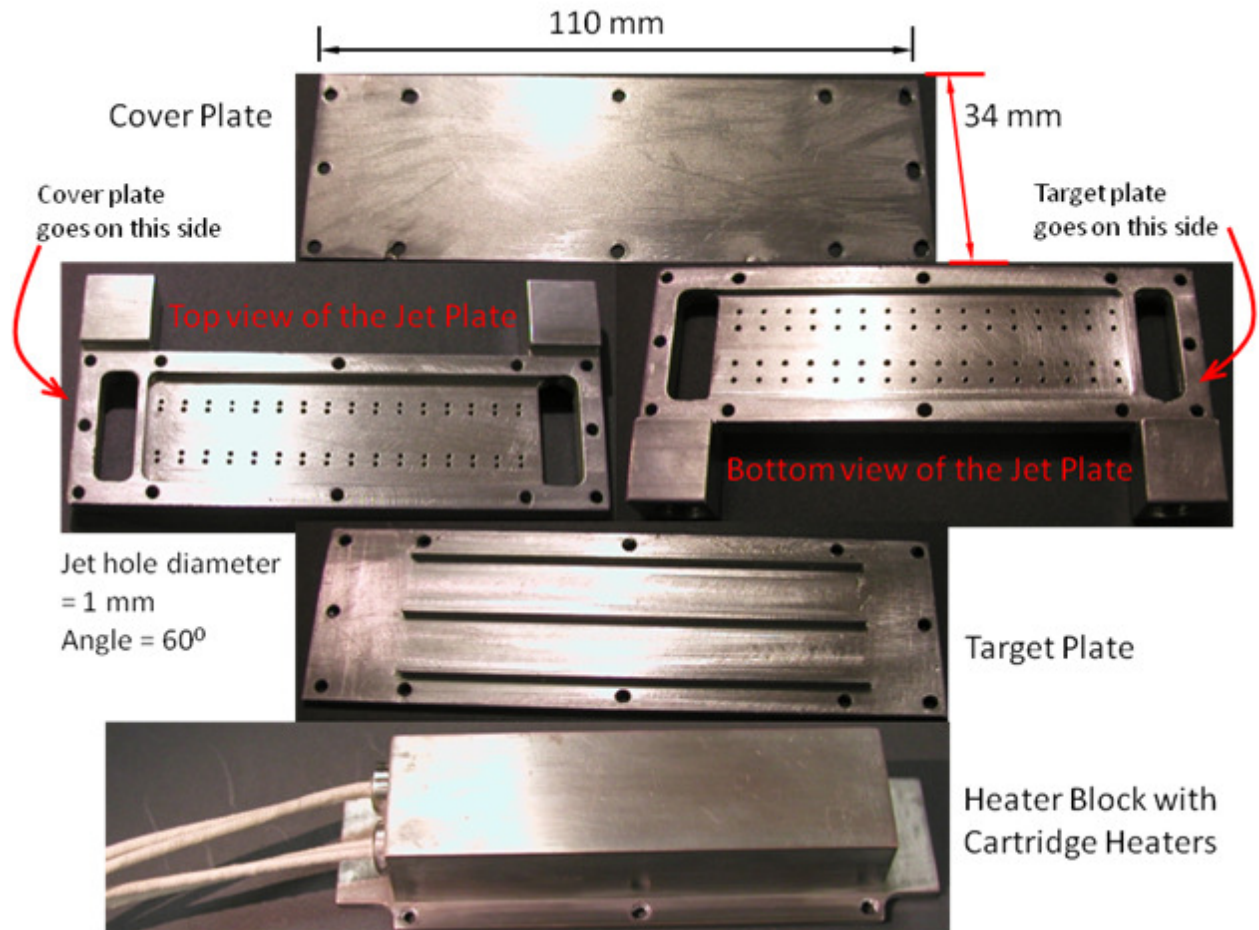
Exploded view of the different components of the test section for the first heat exchanger sample.
